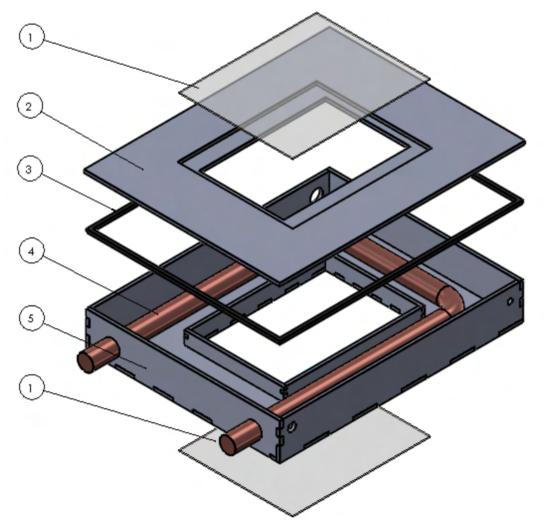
Final SOLIDWORKS drawing of the final design in mm
